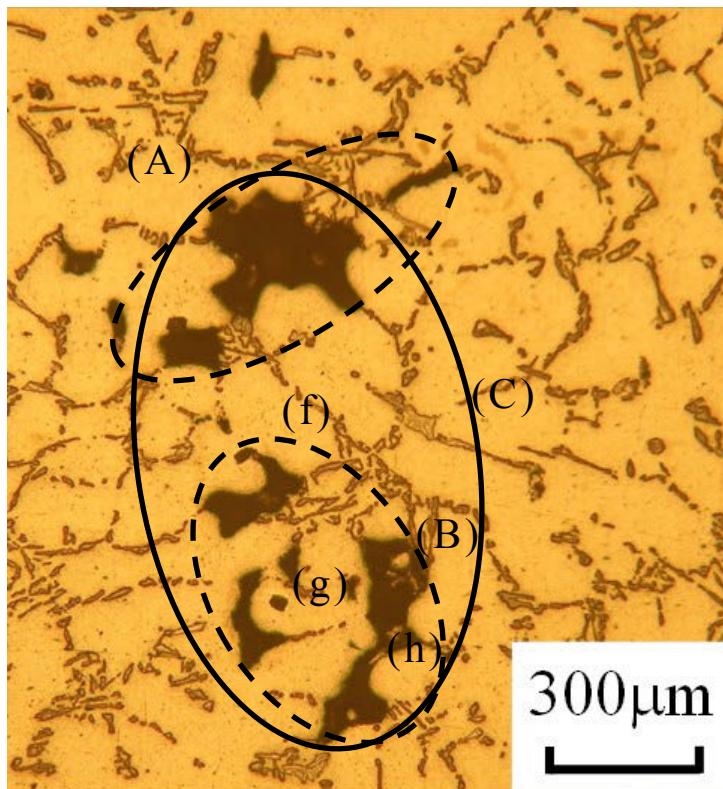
Example of the integration of casting defects in Type 1.
